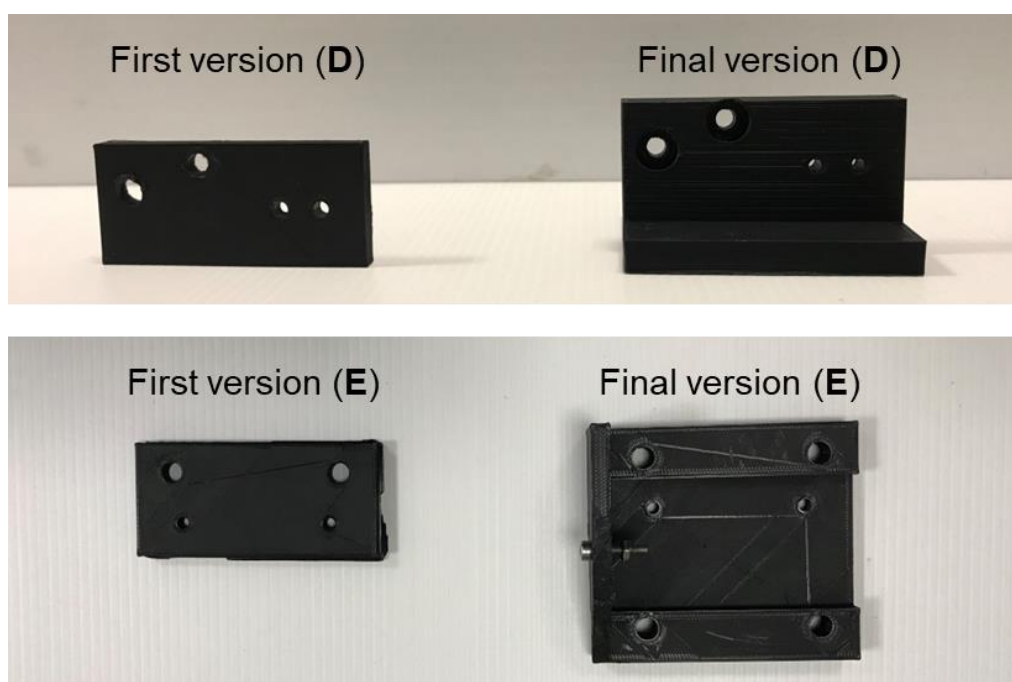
First and final versions of 3-D printed pieces D and E.
